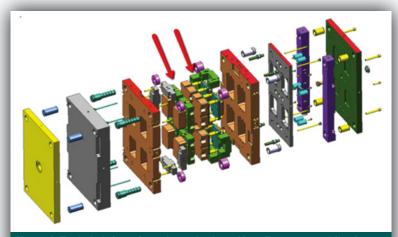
Exploded view of a tool standard used by a European mobile phone OEM. Only the marked areas are customised at the tool maker *Source: AST
